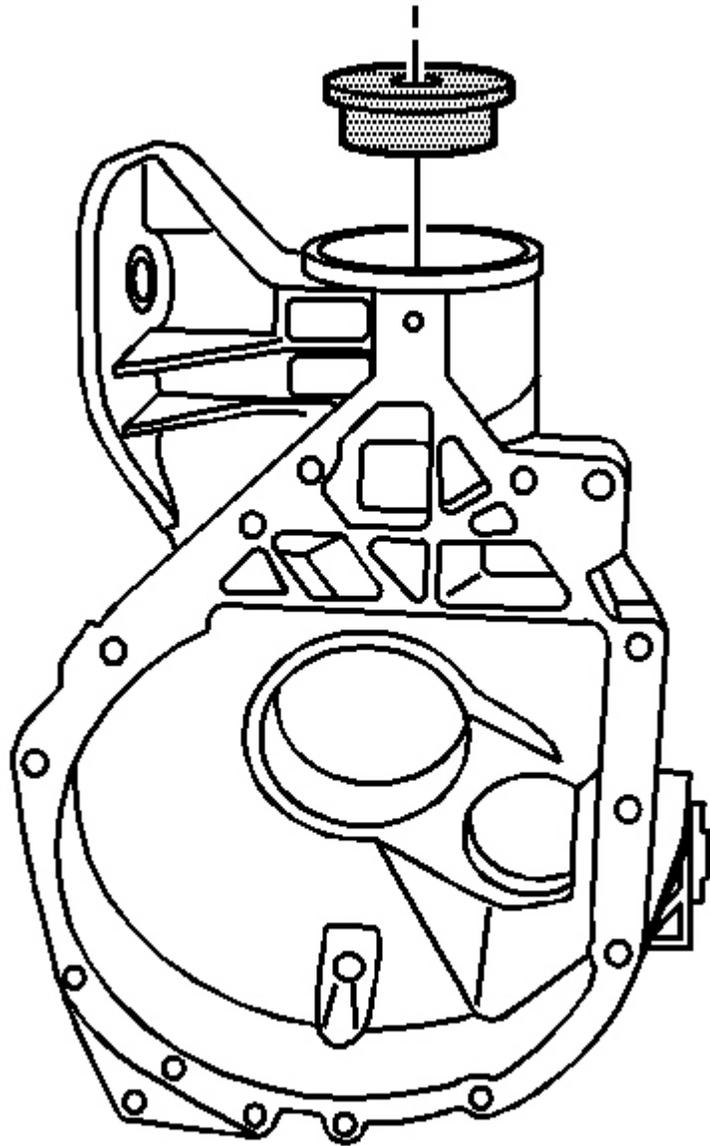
Installing J 45754-1 Over Outer Pinion Bearing Cup
